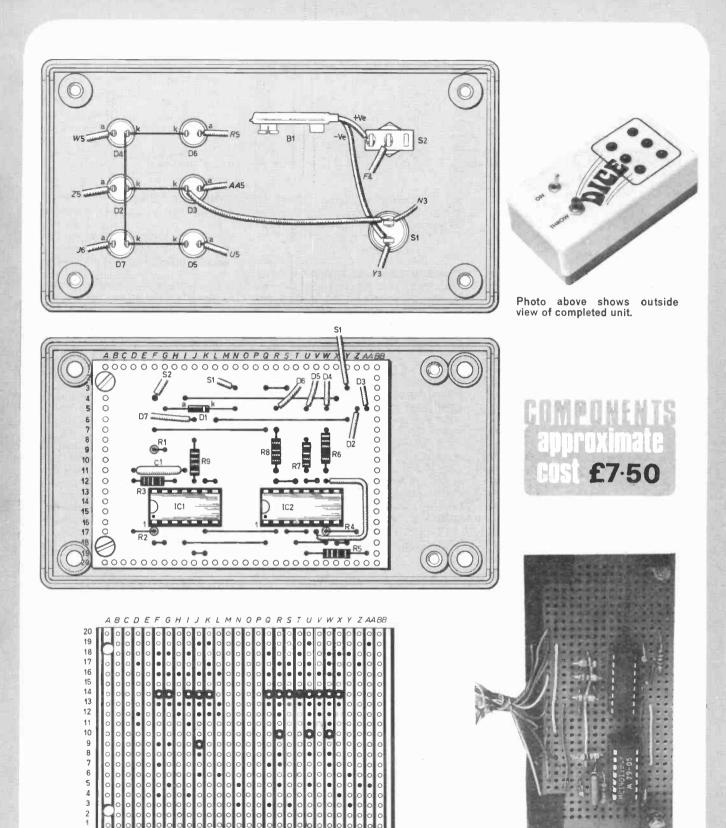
Circuit board layout and interconnections between board and front panel. Note that the copper strips run from top to bottom of the board. Photo bottom right shows top view of prototype board. Layout has been slightly re-arranged for ease of construction.
